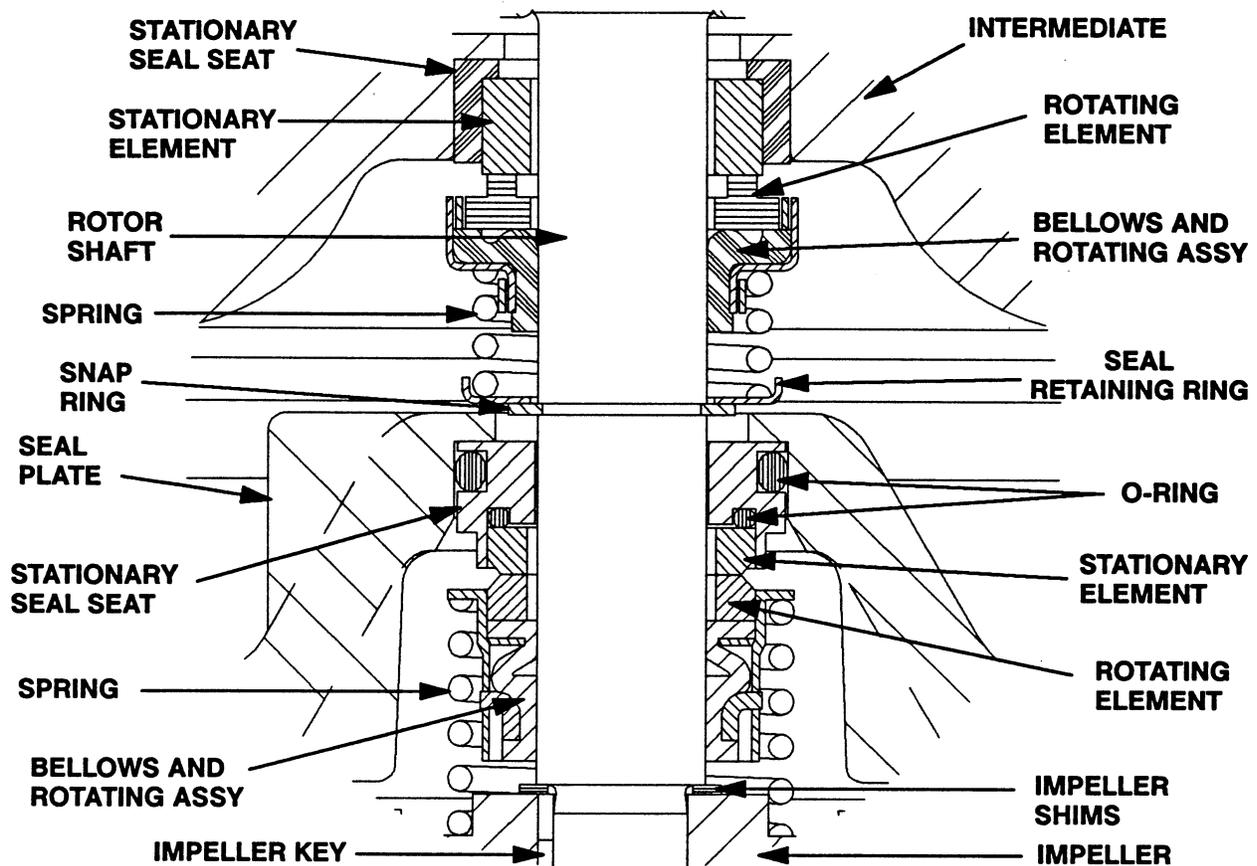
46512-036 (Lower) And 25271-824 (Upper) Seal Assemblies
